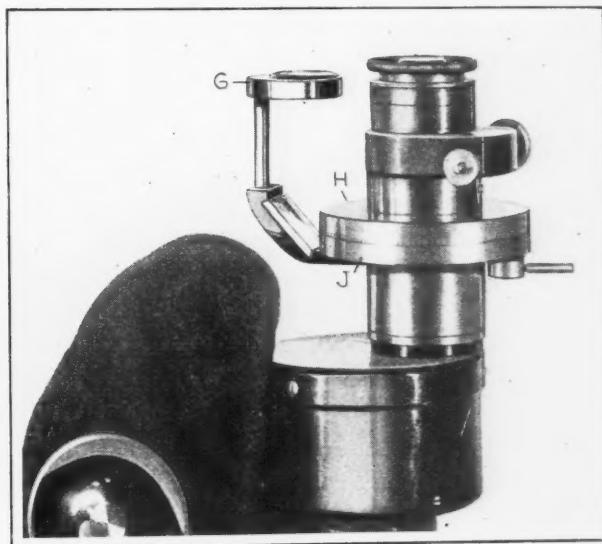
Arrangement of Magnifying Glass and Graduated Collars used in determining the Helix Angle of a Screw Thread
